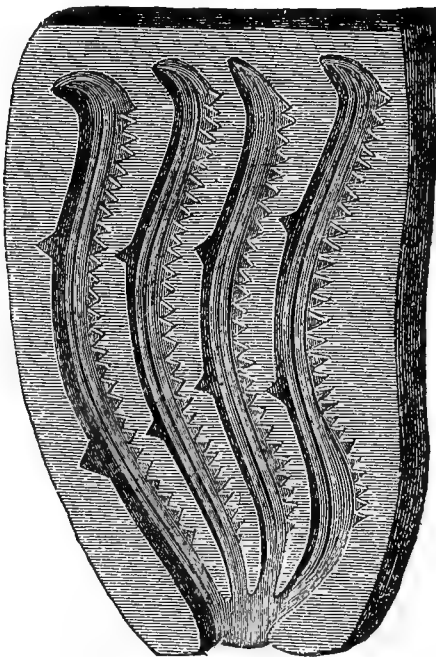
STONE MOLD FOR CASTING FOUR BRONZE SAWS.
